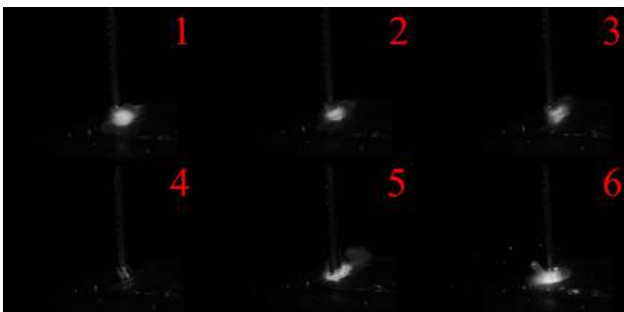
A sequence of frames showing the formation and detachment of the drop using short-circuit transfer mode in GMAW welding process with inverted polarity. Sequence allows visualization of the forces acting on the detachment.
